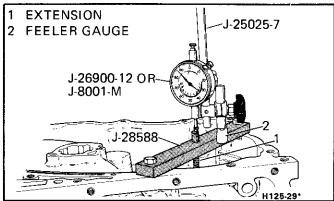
Selective Snap Ring End Play (Sun Gear/Input
